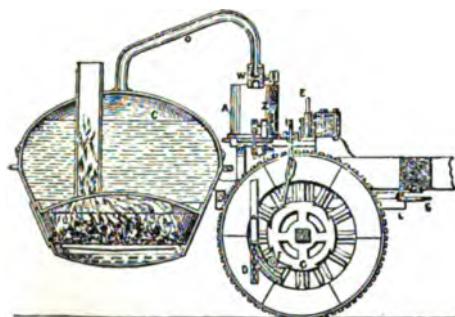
Longitudinal Section of Front Part of Cugnot's Engine.
